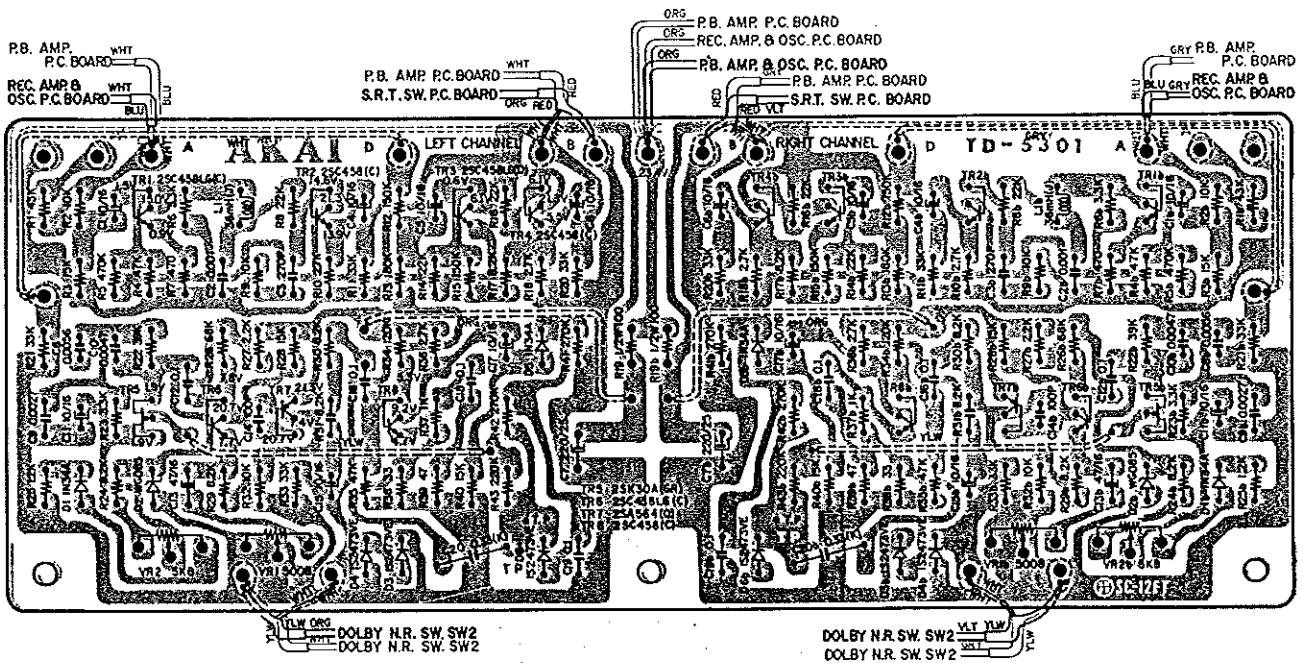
DOLBY N.R. P.C. BOARD TD-5301 (Reverse Side)
